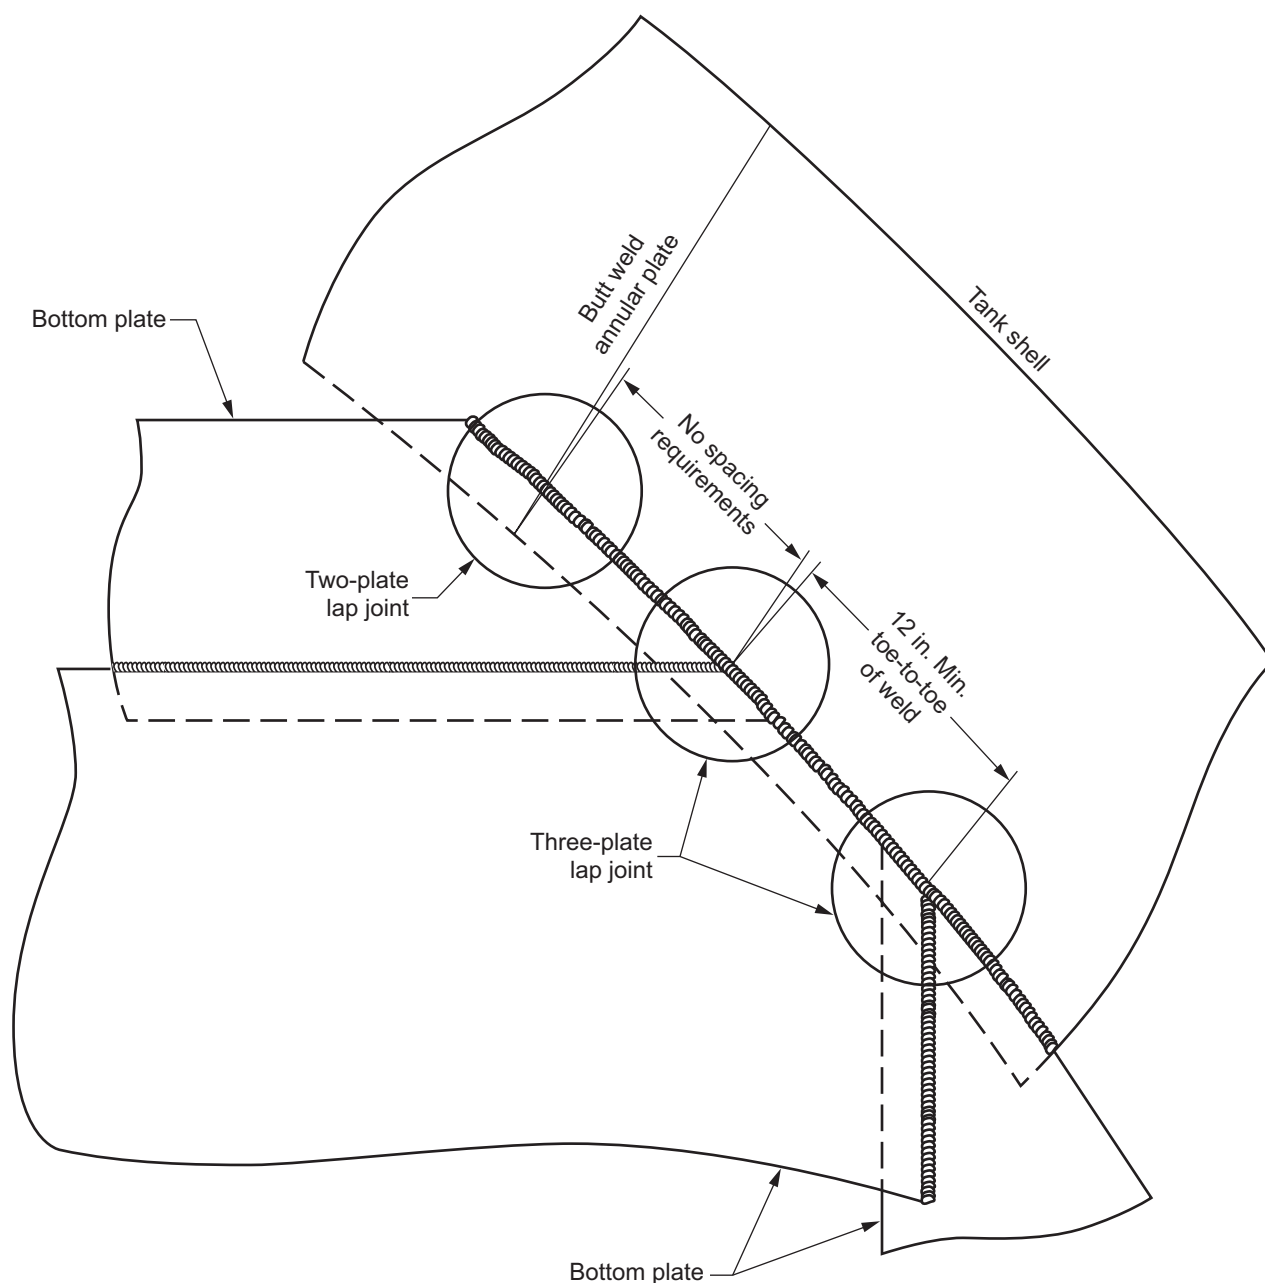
Spacing of Three-Plate Welds at Annular Plates
